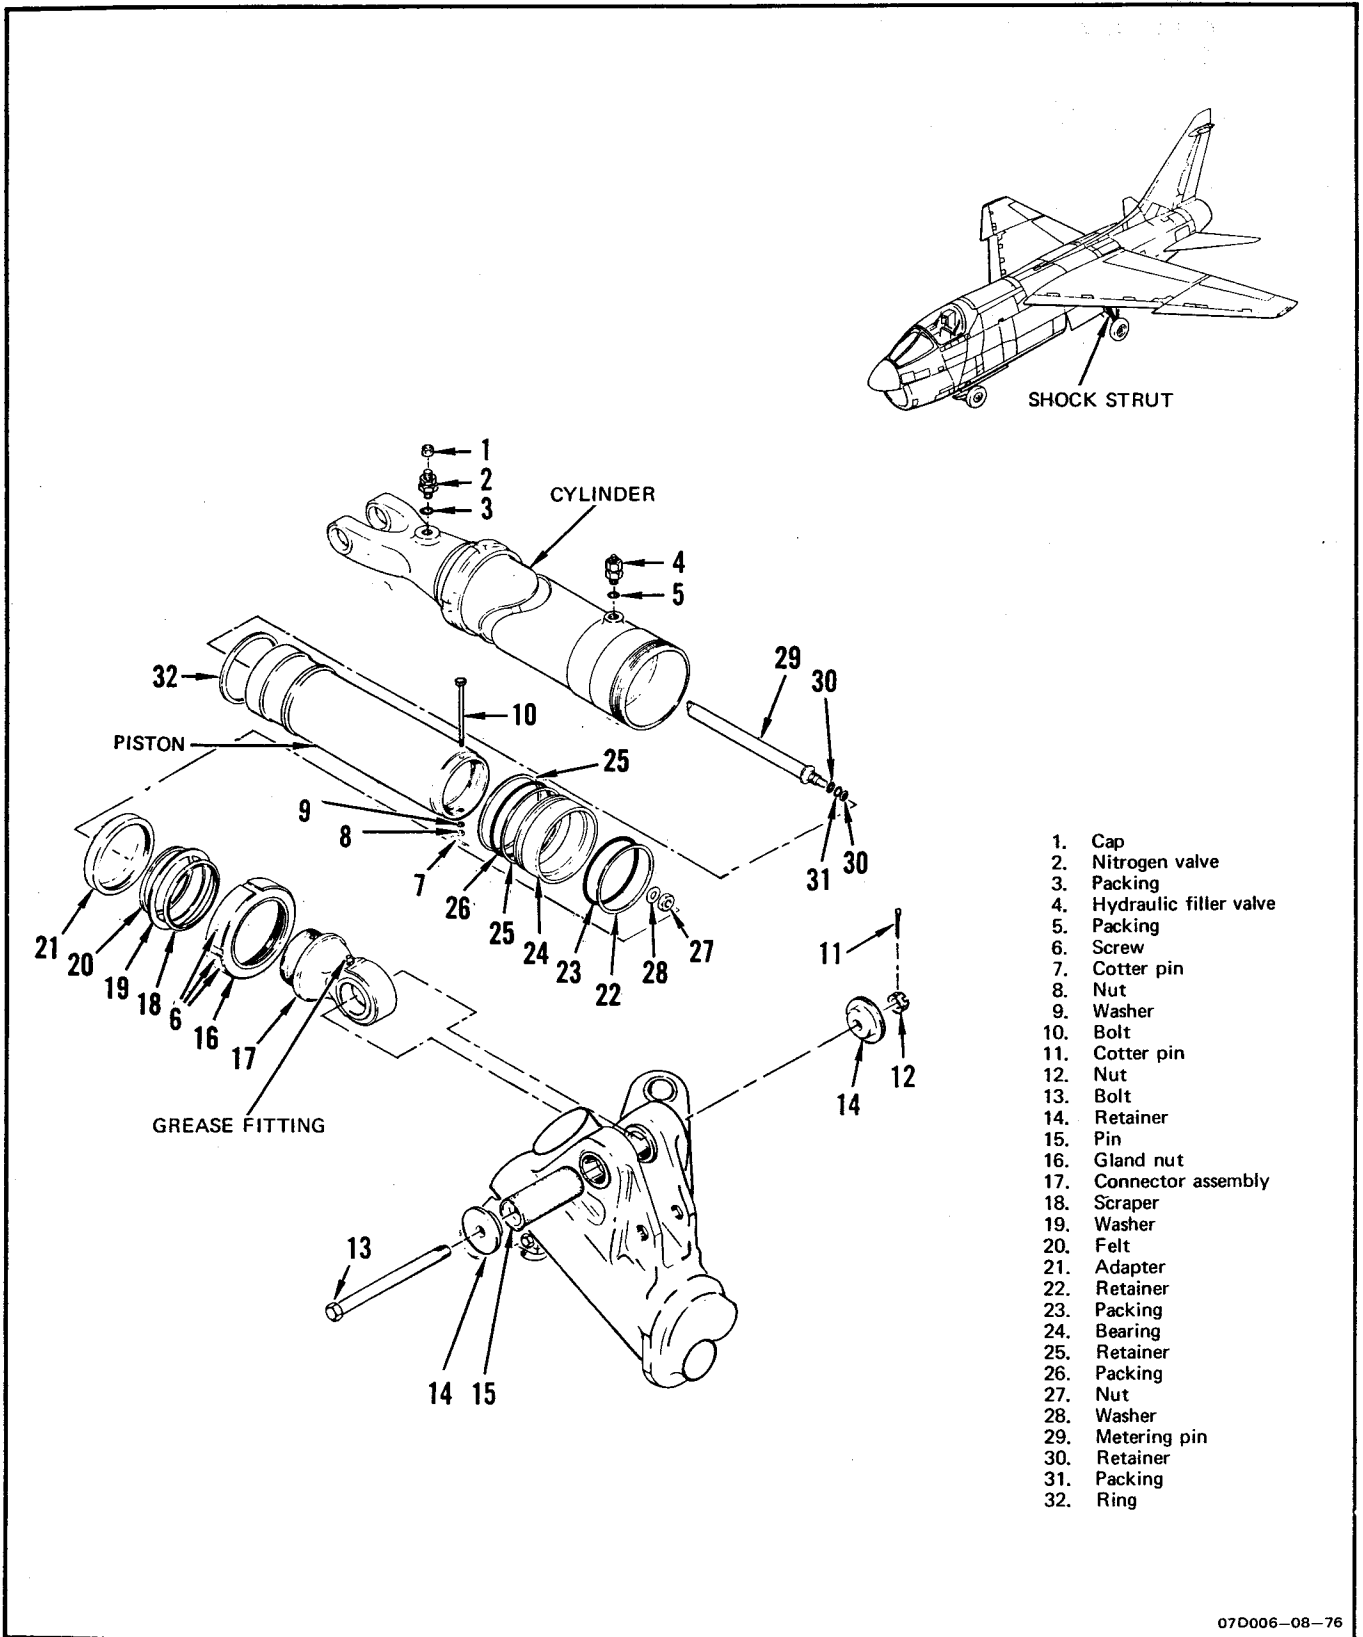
Main Gear Shock Strut Lower Seal Replacement
